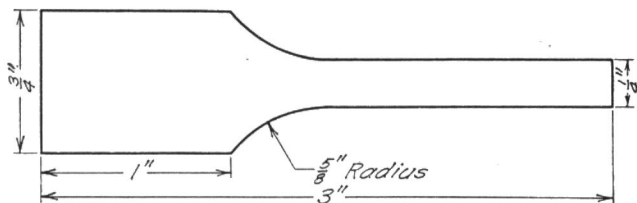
SPECIMEN FOR REPEATED-BENDING ATTACHMENT TO REPEATED-TORSION FATIGUE TESTING MACHINE
